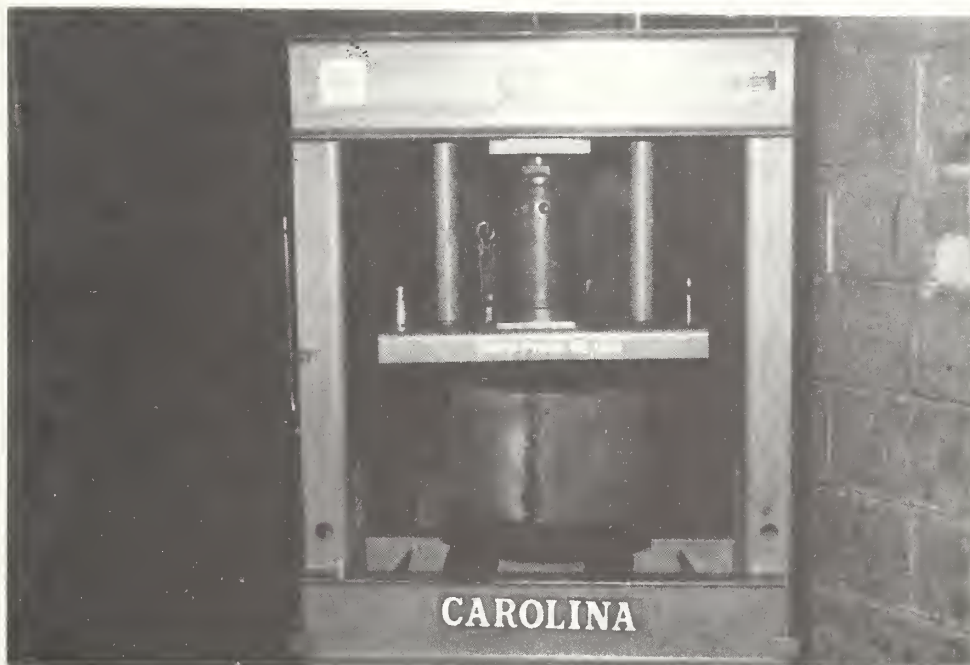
AXIAL SHEAR TEST FIXTURE (FROM B.F. GOODRICH BRAKE BONDING MANUAL)
